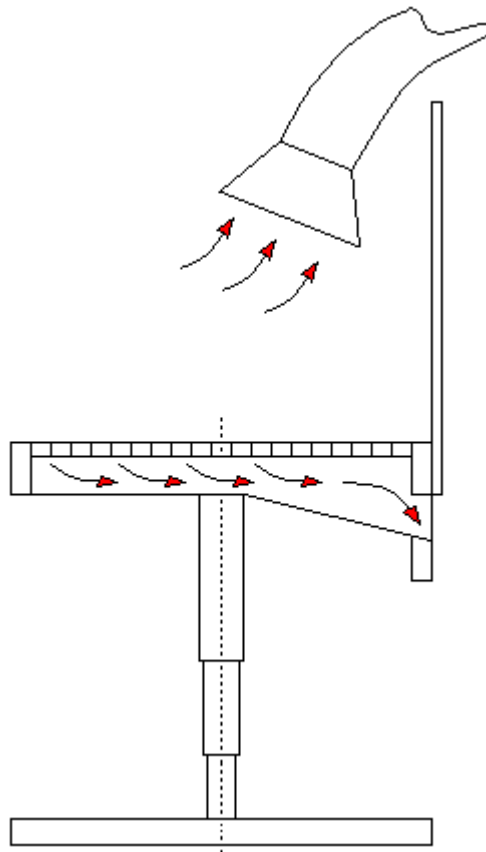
Schematic diagram of the welding table system with upper and lower extraction of welding fumes and dust
